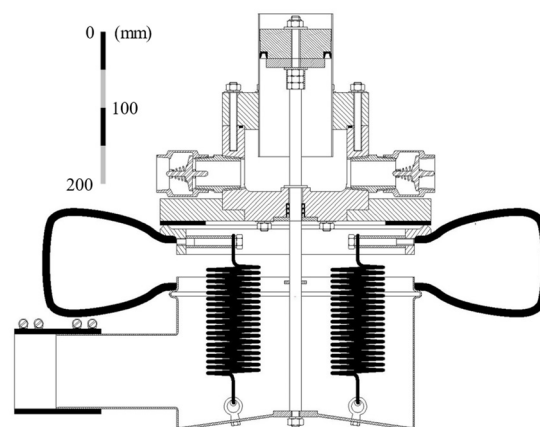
Bunyip PA-13 technical drawing, scalable using 100 mm drive pipe, inferred from private communication with the manufacturer [16].
